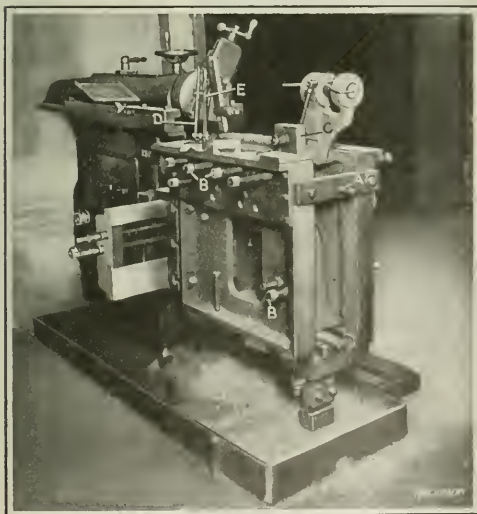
Twenty-four-inch Shaper equipped for planing the Drilling Head Bearing on Columns of Single-spindle Drilling Machines
